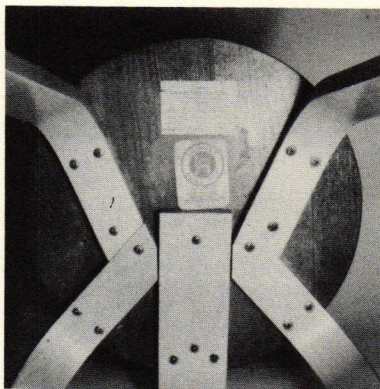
In this construction electronic welding with rubber mountings achieves flexibility with strength.
